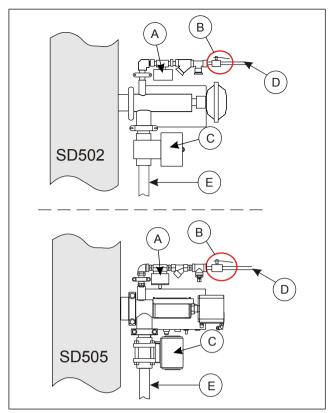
Connections of Valmet SD502/SD505: A - water valve, B - closing valve, C - sample delivery valve, D - water in, E - sample line.
